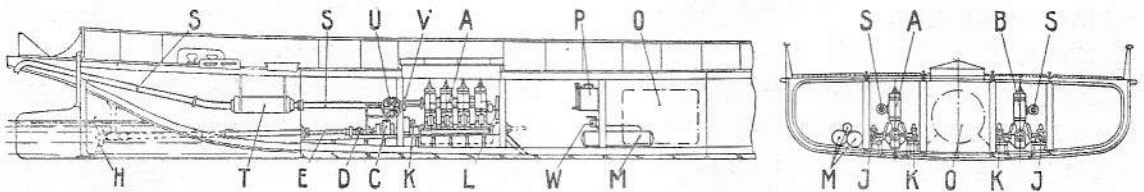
Machinery Arrangement of a Ferryboat on Lake Constance, with two Diesel Engines of 80 B.H.P. each.
